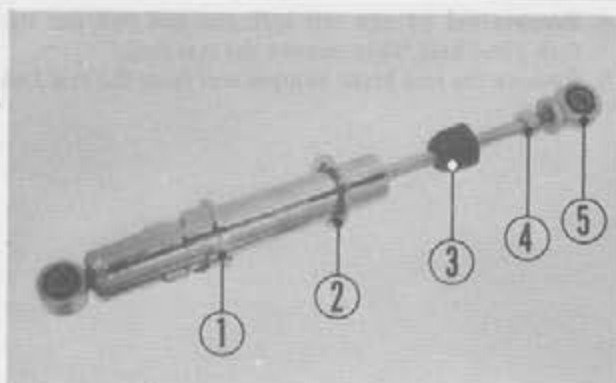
① Spring adjuster ④ 10mm lock nut
